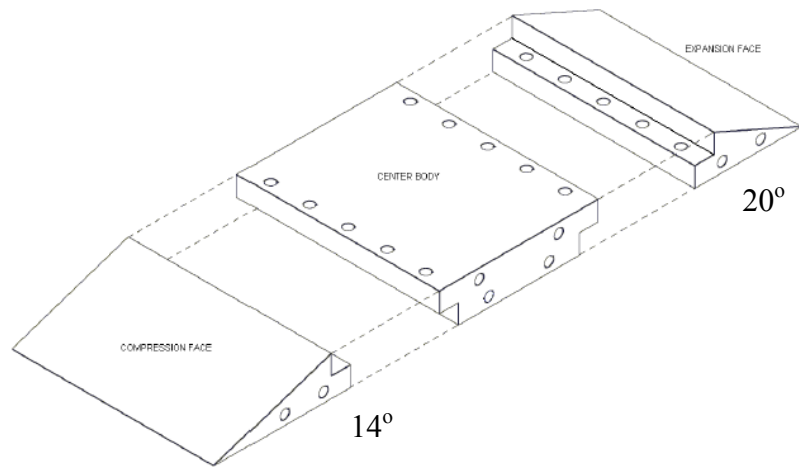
Assembly drawing of the 20° and 14° compression ramps.
